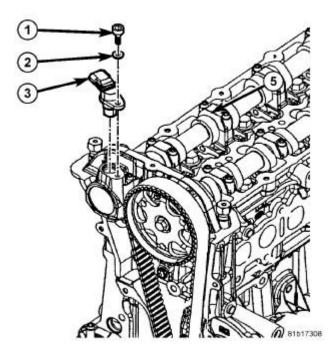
Camshaft Position Sensor Courtesy of CHRYSLER LLC
